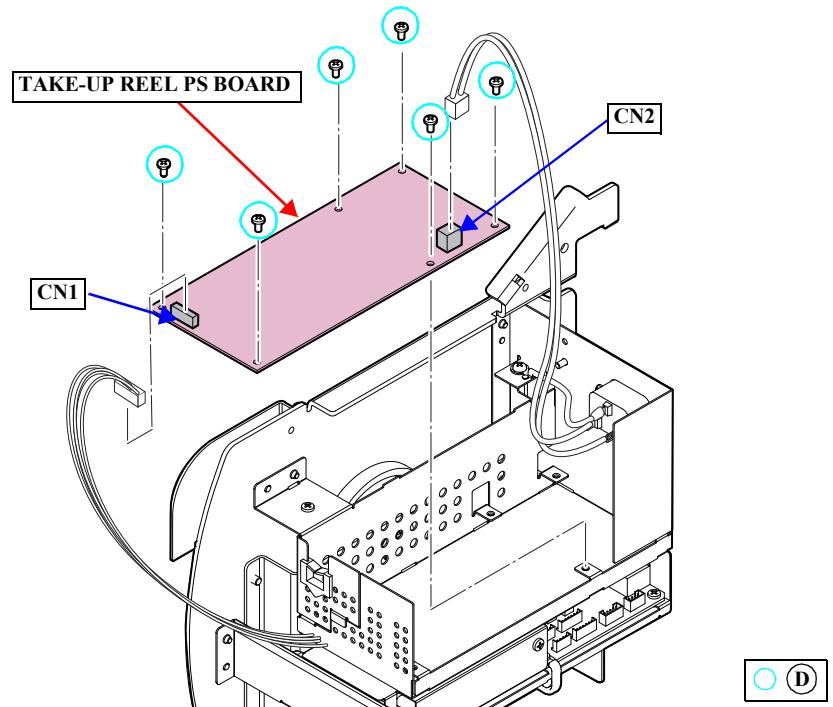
Removing the TAKE-UP REEL PS BOARD
